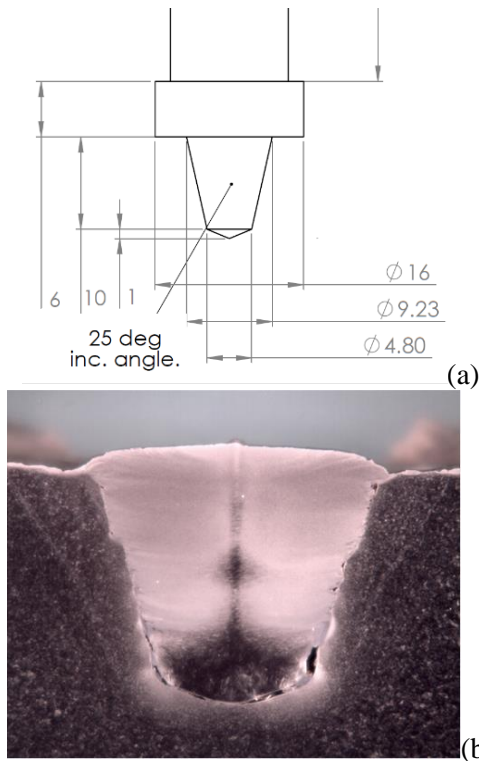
(a) Example of current taper plug dimensions and (b) cross section of taper plug weld showing some lack of fill near the base.
